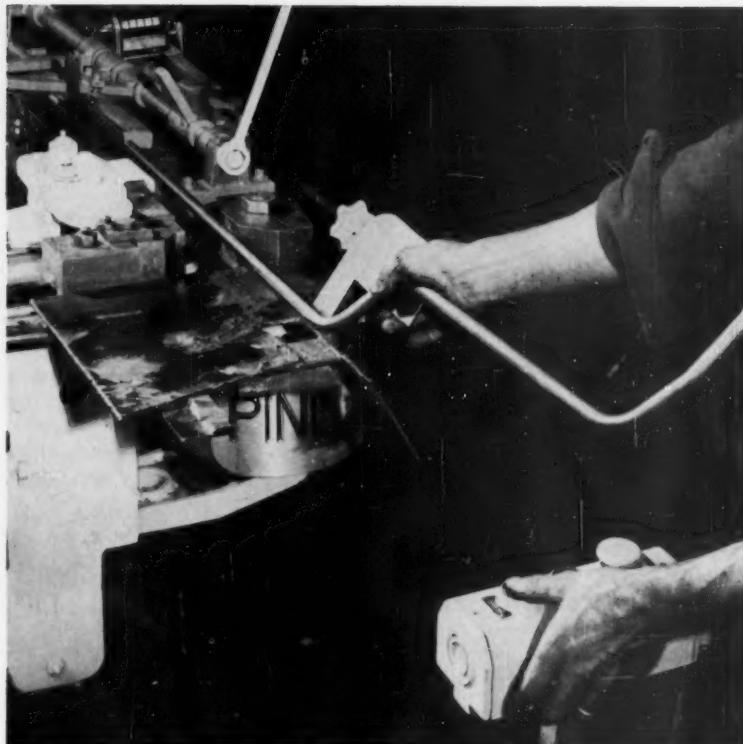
Note workpiece position against locating plate in the last bend of six, which completes cold forming of a frame member for a toy car.
